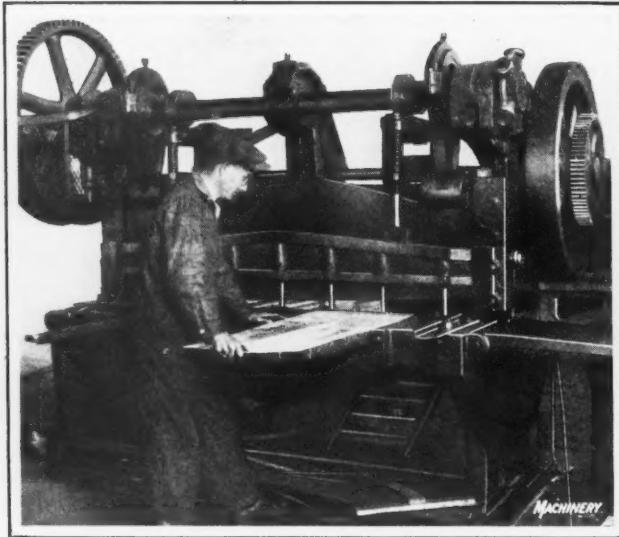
Shearing Sheet Metal to Correct Size for forming Cartridge Tank
